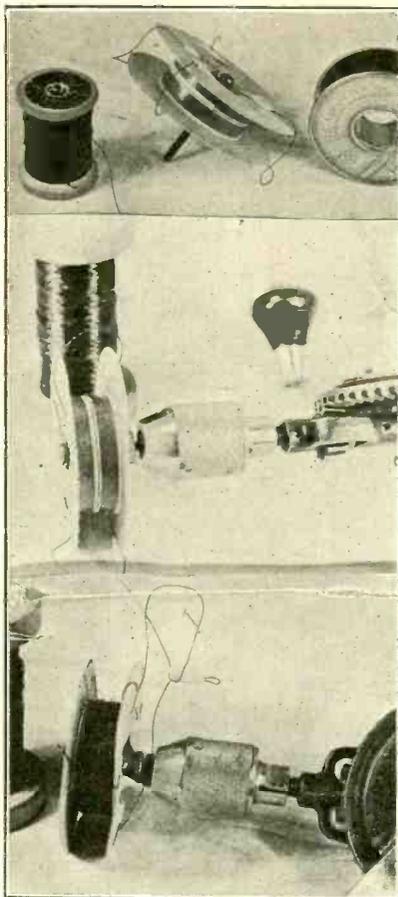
(top), fasten several threads onto the pillbox with adhesive tape. These will be used later as tie threads. Fig. 8, place the little reel you have just made in the drill chuck of any hand-drill and you are ready to wind the coil. Now wind about 25 turns of the wire and take a tap. (Fig. 9). Scrape the enamel off the wire to take the tap.
